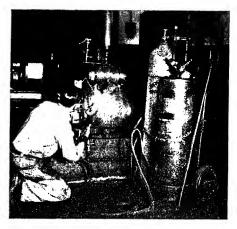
Oxy-acetylene welding and cutting outfit mounted on a hand truck.
